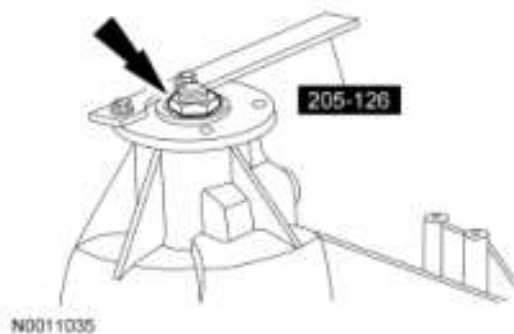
Locating Output Flange Nut And Special Tool (205-126)
